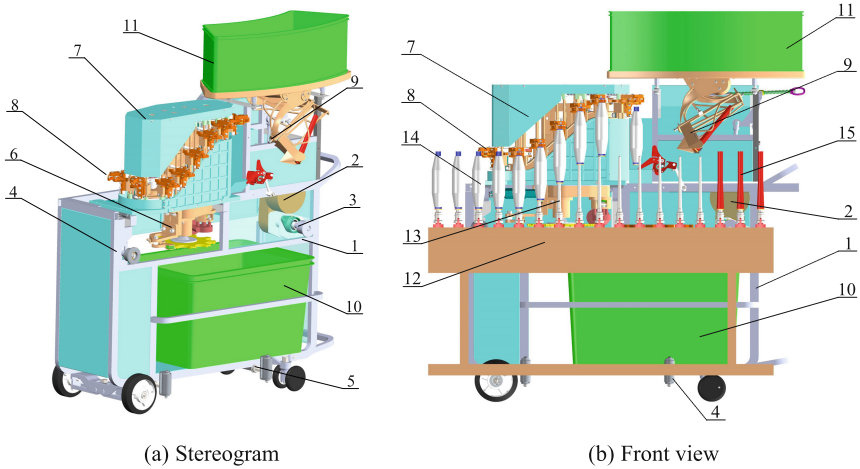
The structure of the SCMG robot. 1-frame; 2-first motor; 3-active guide roller; 4-following guide roller; 5-support roller; 6-locating device; 7-doffing device; 8-gripper; 9-bobbin insertion device; 10-cop basket; 11-bobbin basket; 12-ring spinning machine; 13-spindle; 14-cop; 15-bobbin.
